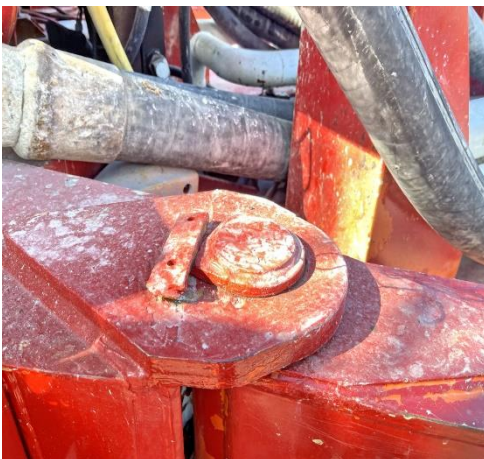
Rear outriggers pivot pin. Pin retainer weld broken
